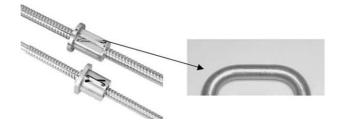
Ball screw with outer re-circulating mechanism, and appearance of return tube.
